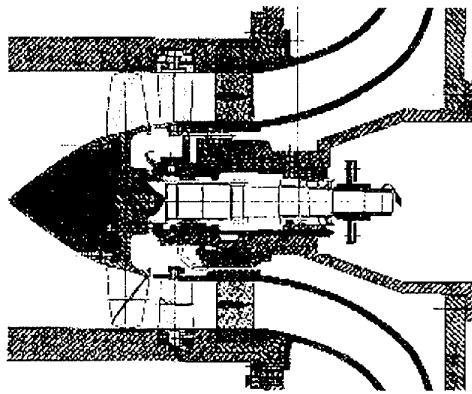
Single Stage High Speed Compressor Test Rig, Cross Section
